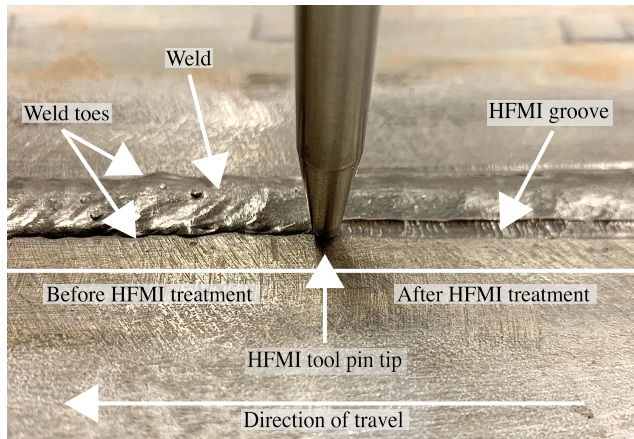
A weld is shown before and after HFMI treatment. Note the transformation of the weld toe into a smooth and shiny groove. Reprinted from [1], licensed under CC BY 4.0.
